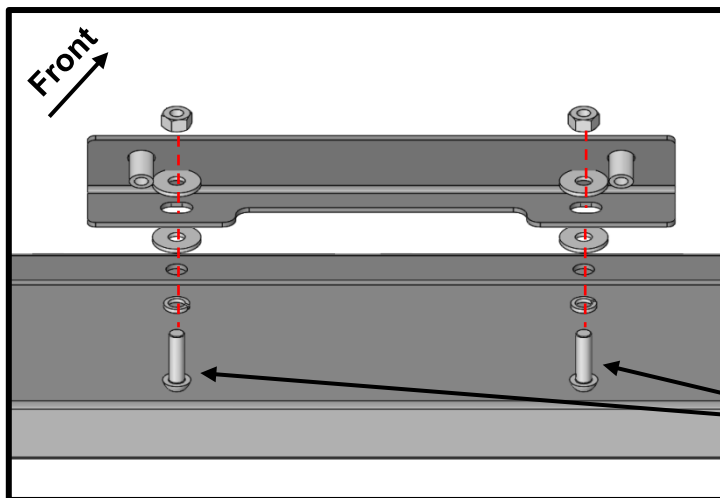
Align the Bull Bar to the Mounting Brackets and install as pictured.
